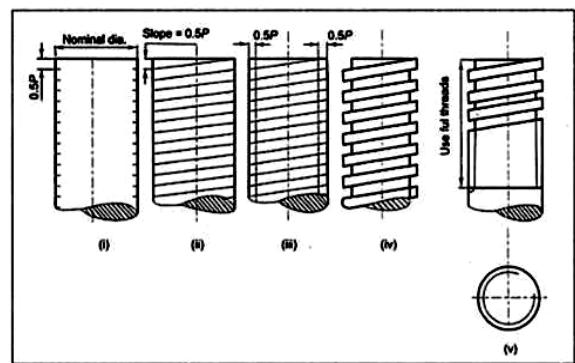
Procedure for Drawing Conventional External Right Handed Square Thread
